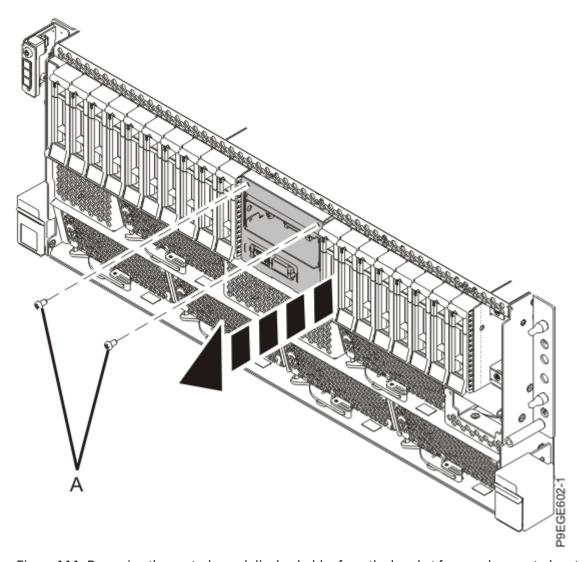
Removing the control panel display holder from the bracket for a rack-mounted system
